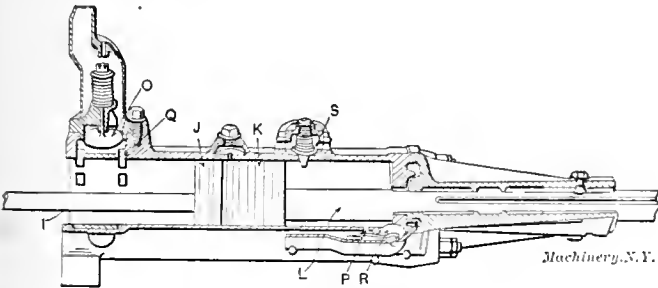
Air Cylinder in which the Air is compressed and used to impel the Pick-carrying Piston.
